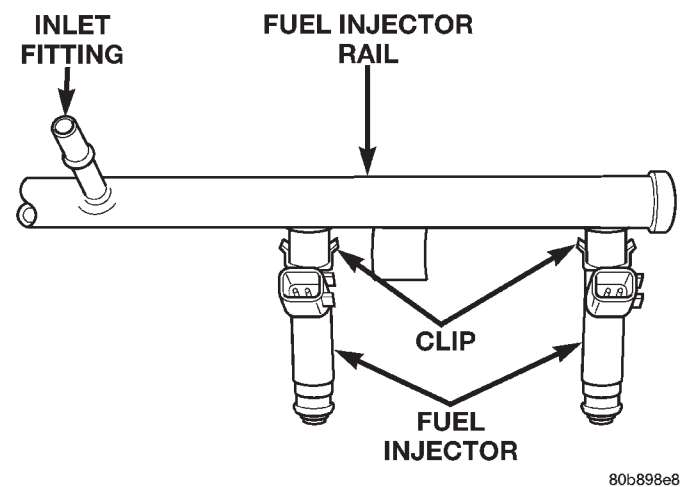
Fuel Injector Mounting—Typical (4.7L V-8 Engine Shown)
